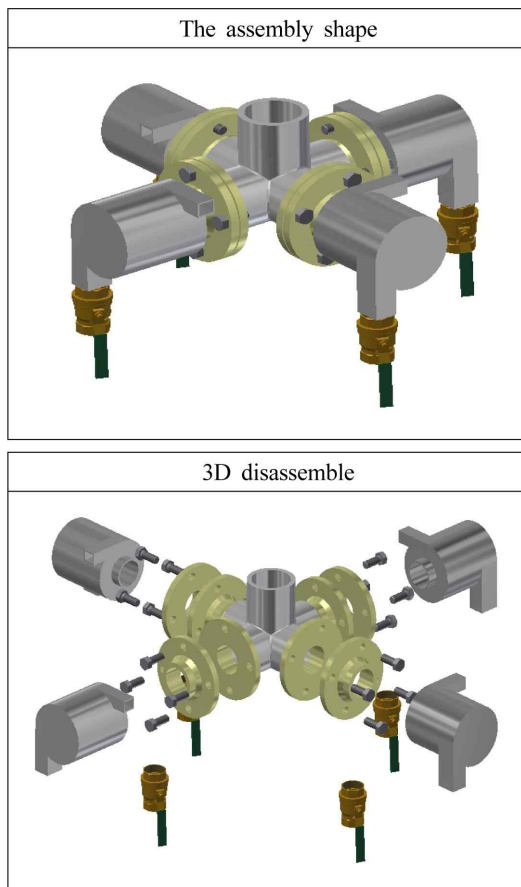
The assembly shape and 3D disassemble of the cyclone filter
